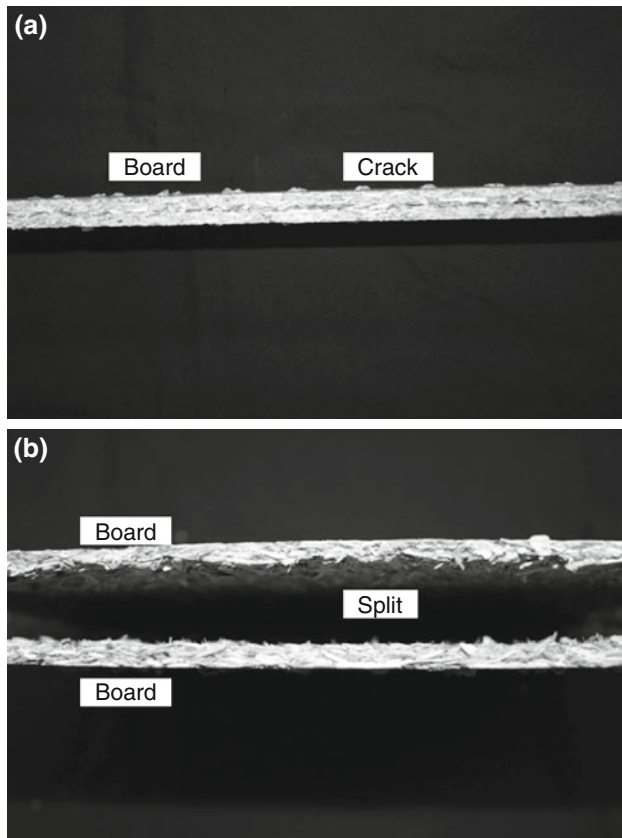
Failure of board manufacture. a There is a crack within the board. b The board split completely
